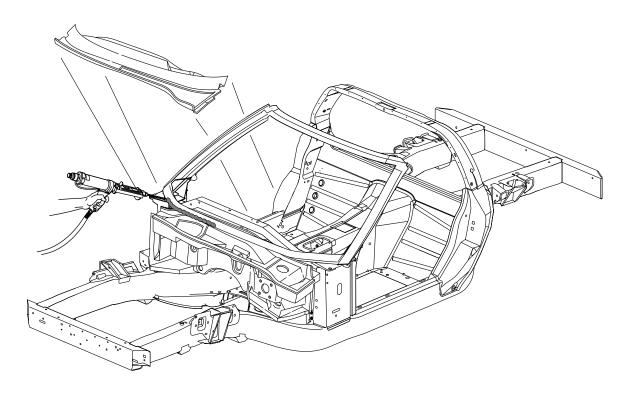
Install Adhesive to Windshield Frame for Upper Plenum Installation
